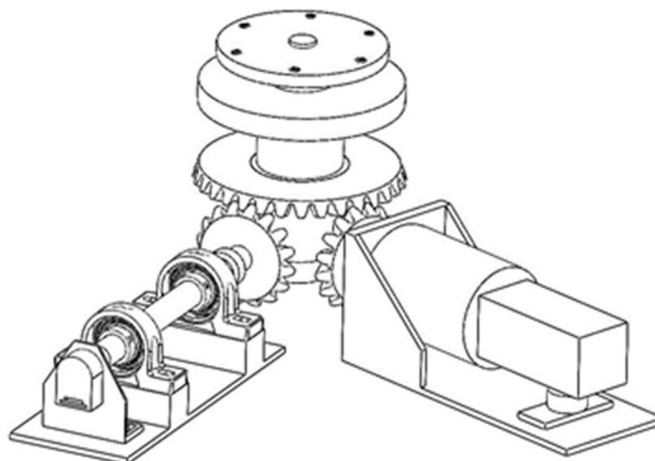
Details of the gear and motor used to rotate the platform and the encoder that reads its position, the collector system through which the data from the encoders are sent to the motor, and the plate fixing it to the upper base of the platform.
